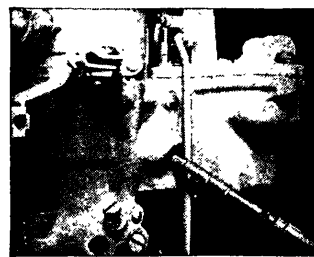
Install nozzles and passage plug. Put new gasket in nozzle before installing. Slip nozzles should always be installed with flat surface upward. Insert new copper washer in casting before installing plug
